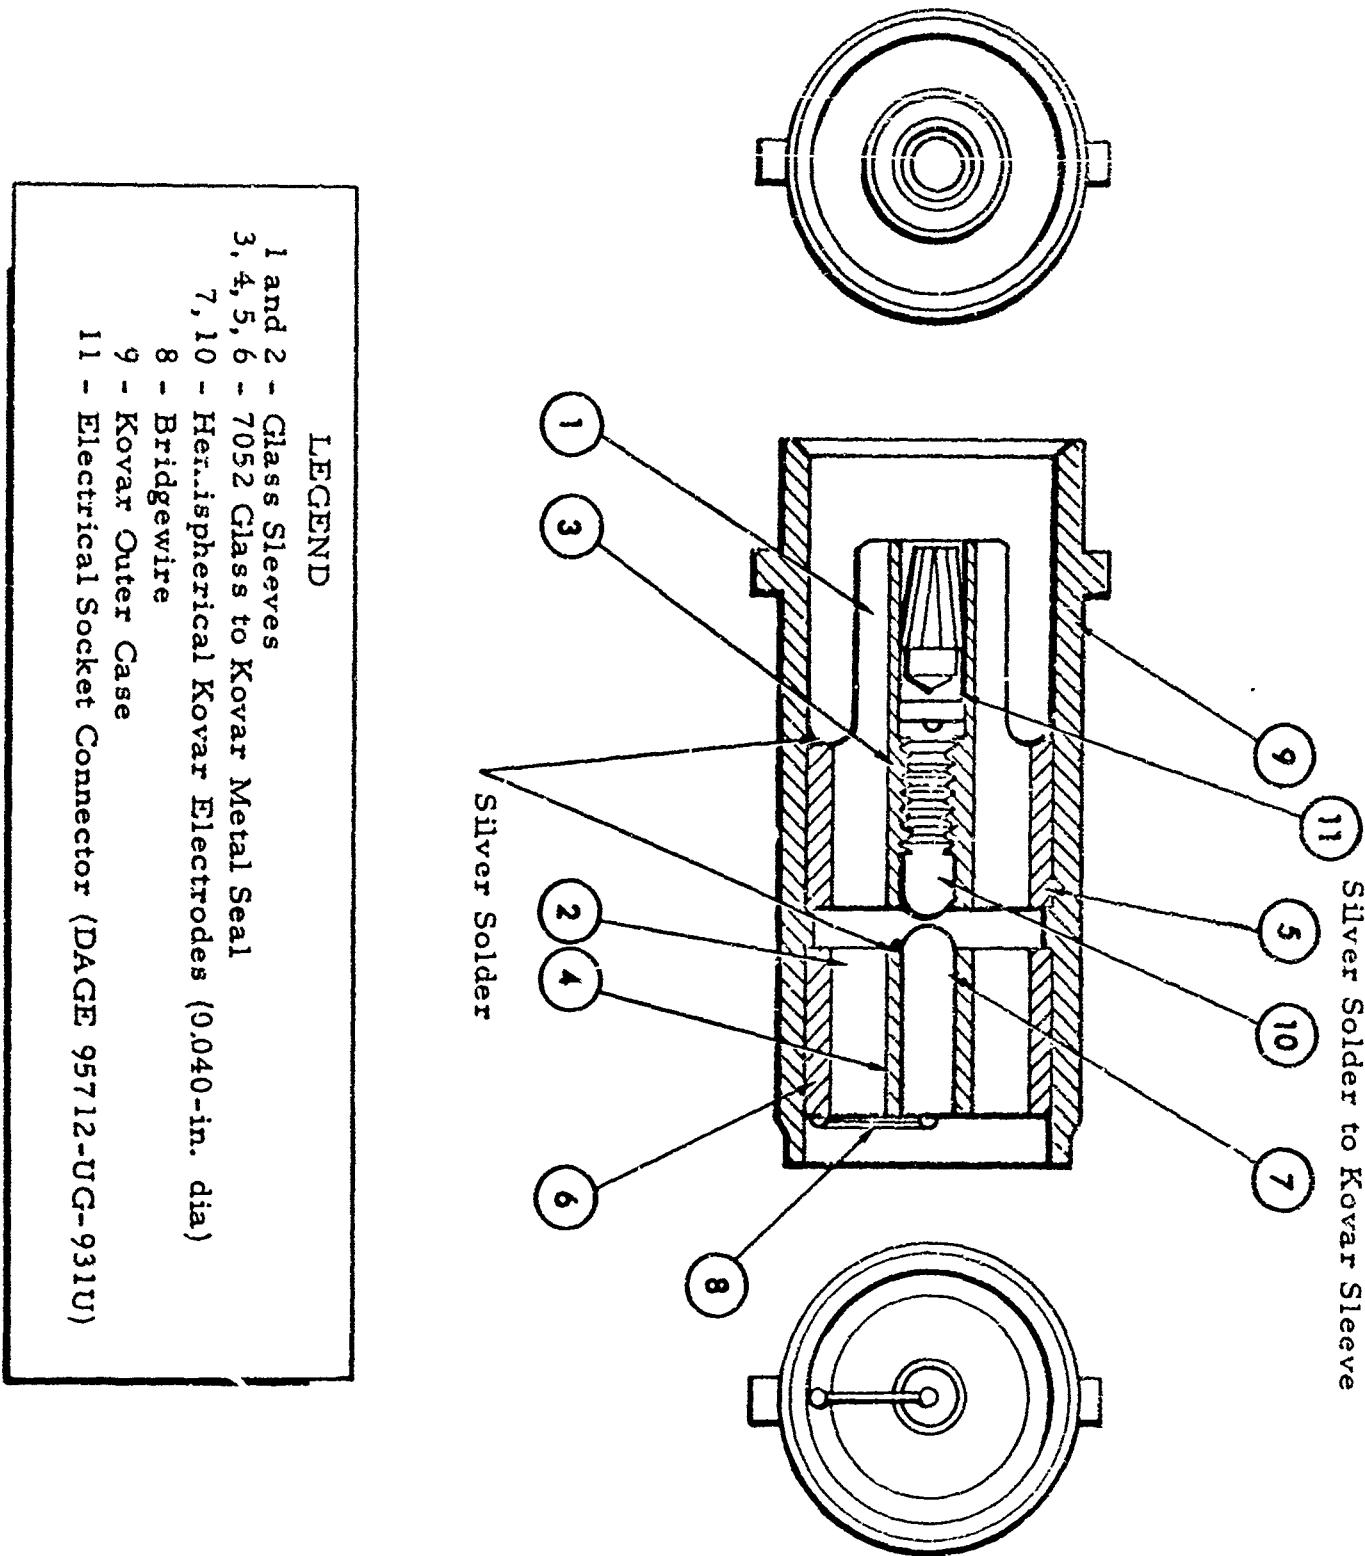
Final Design, Prototype SOGS Initiator Assembly.
